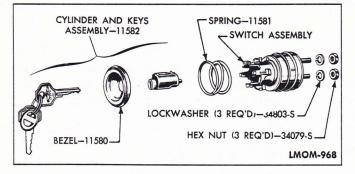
Ignition Switch. Disassembled View with Basic Part Numbers
